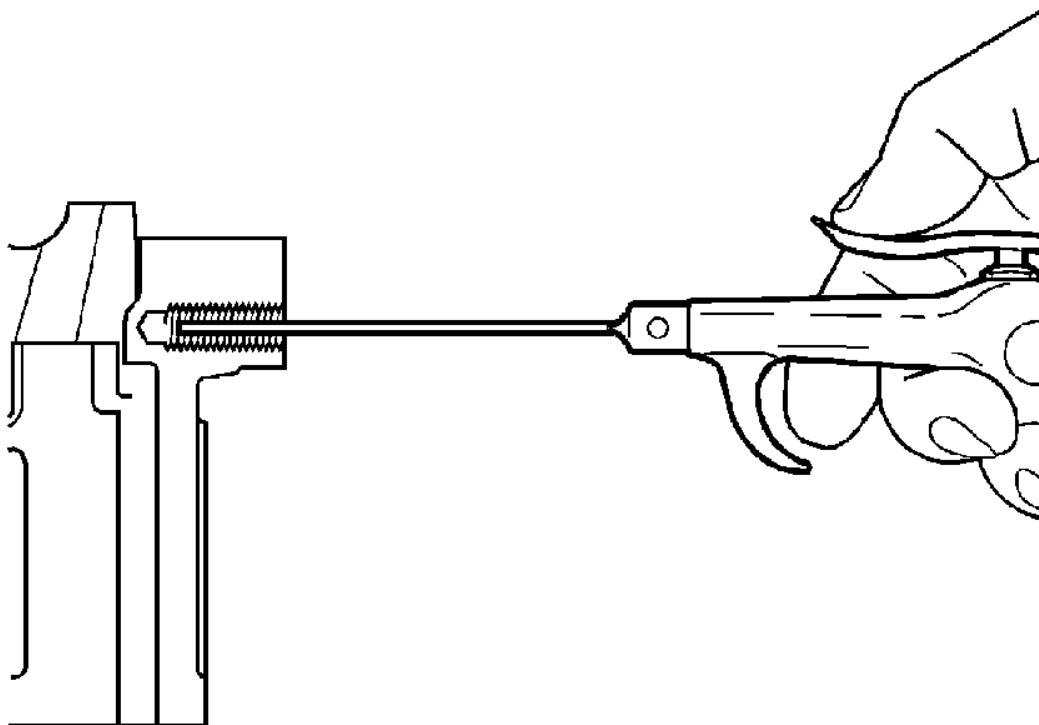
Identifying Drilling Out Threads Of Damaged Hole
